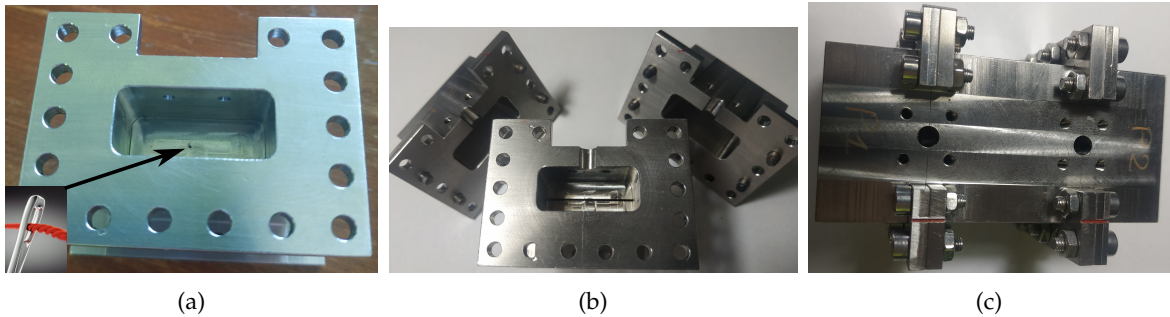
2cav-Cap modules manufacturing: (a) appearance of the *2cav-Cap-ModuleCap* module after trying to drill the threading hole, (b) final aspect of the three modules, and (c) assembling of all the modules.
